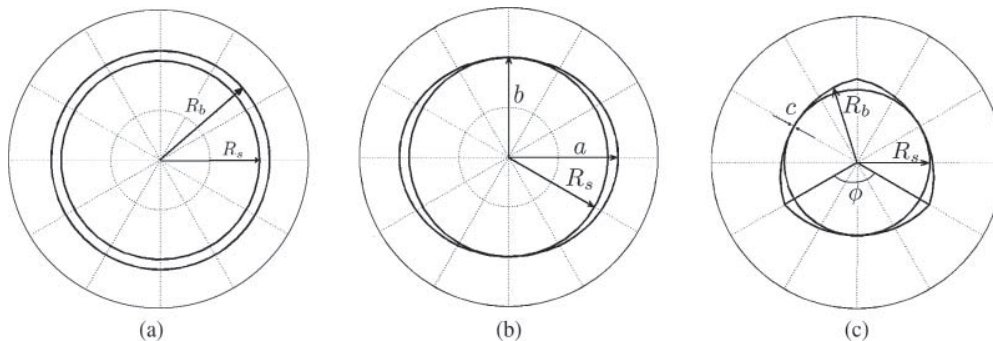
Sketches of the different bearing geometries. (a) Sketch of a cylindrical bearing. (b) Sketch of elliptical bearing. (c) Sketch of polygonal bearing.
